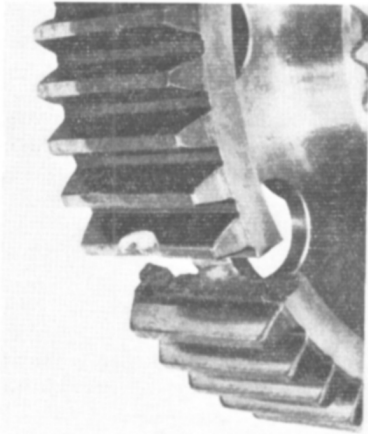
Fangue Failure of Gear through Drilled Web and insufficiently Stiff Rim
